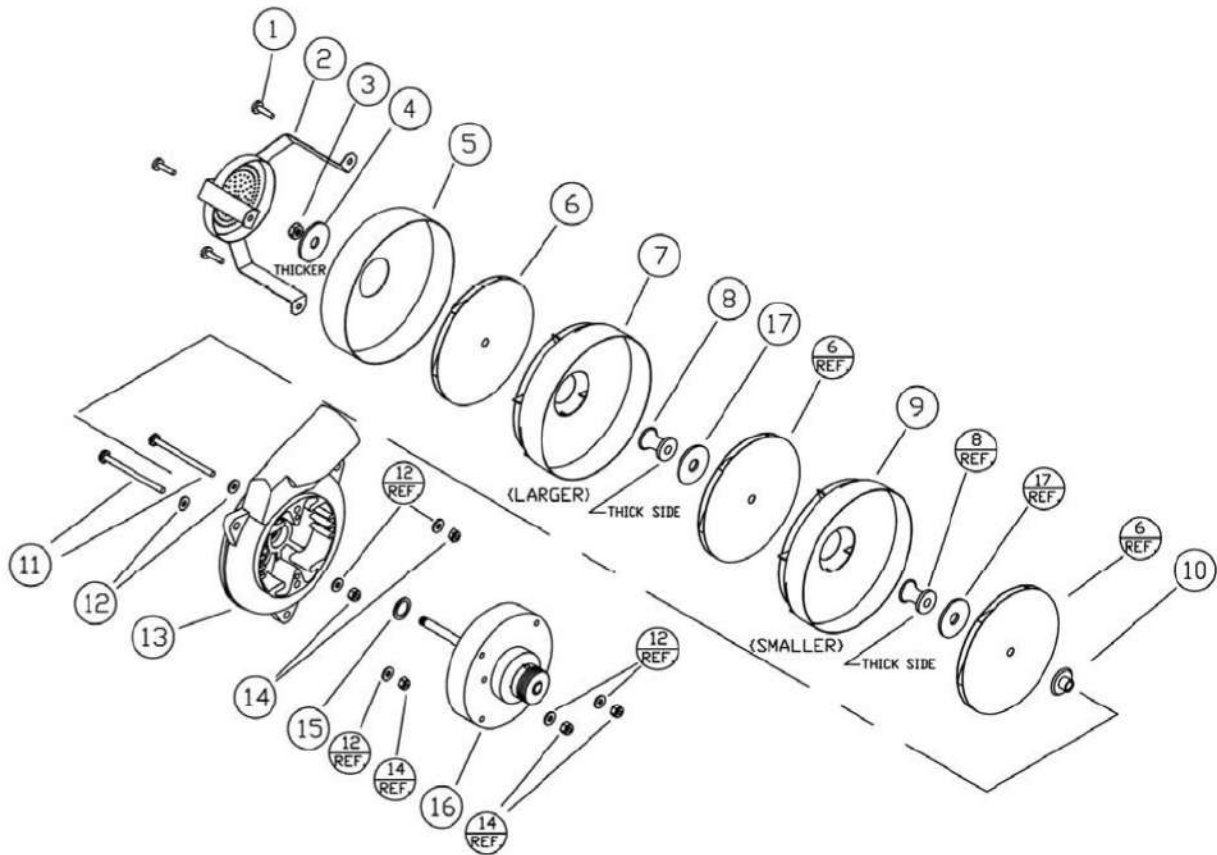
PLATE AY., ENGINE/BLOWER (P/N: 39668)
